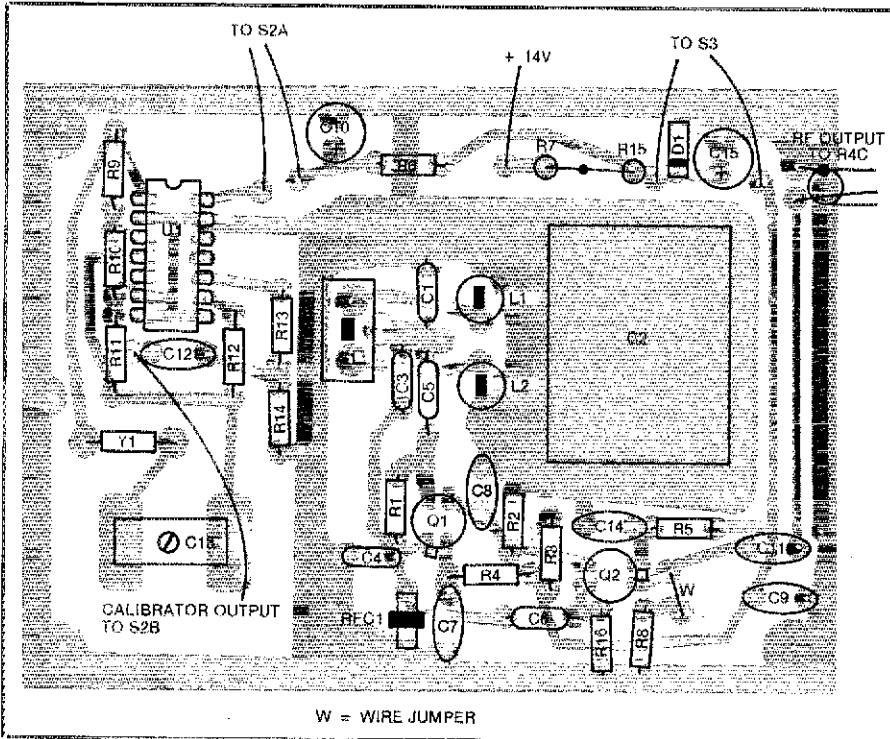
Parts-placement guide for the general-coverage receiving adapter. Parts are placed on the unclad side of the board; the shaded area represents an X-ray view of the copper pattern.
